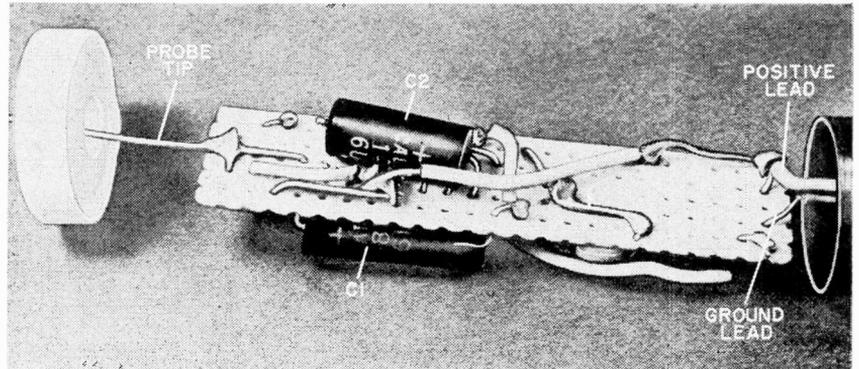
The parts fit the small board easily if you follow the layout shown here. Make sure you have a small hole in the container to make screwdriver adjustments of R3 as required during operation.
